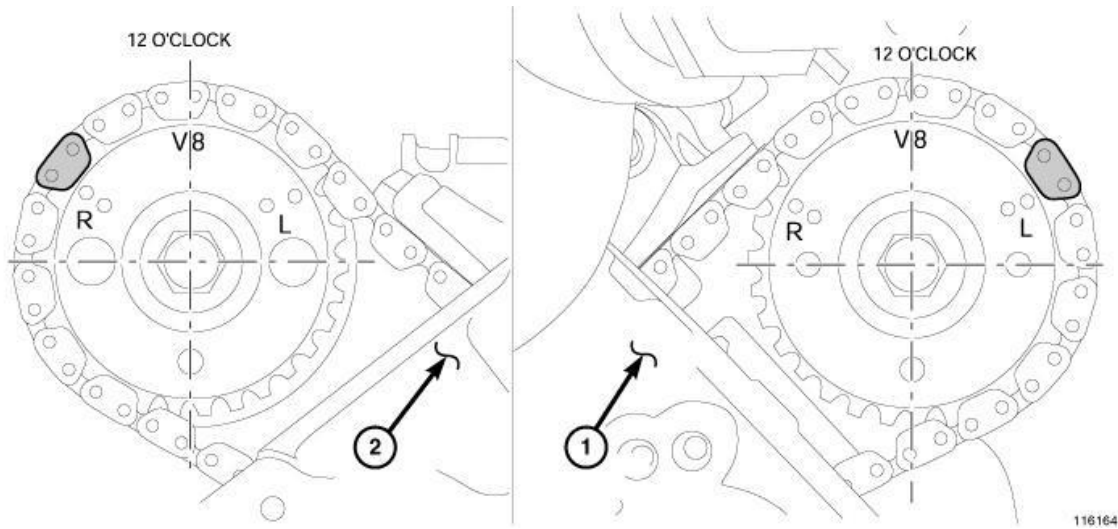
V8 Timing Mark On Camshaft Sprocket
